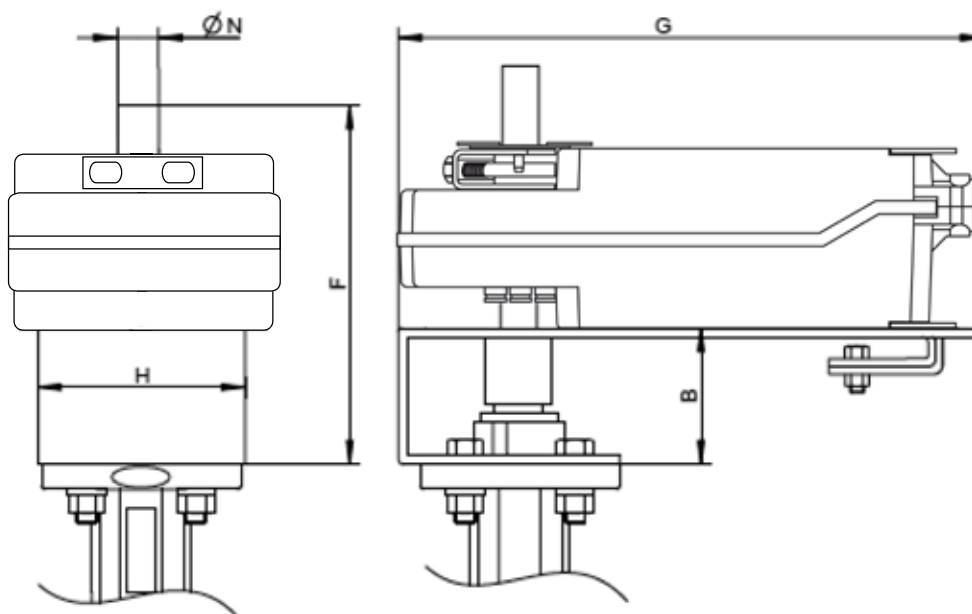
VFB Series Valve actuated with M9000 series electric actuators - Dimensions in mm (See table 7)
